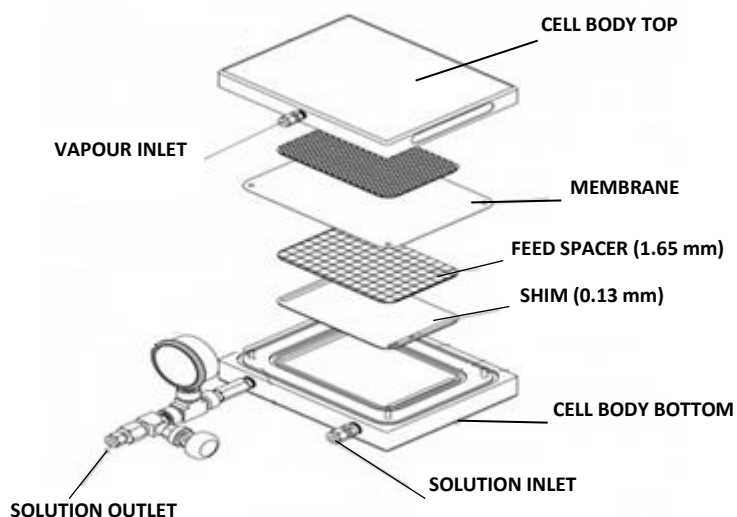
SEPA-CF membrane module assembly provided by Sterlitech [58].
